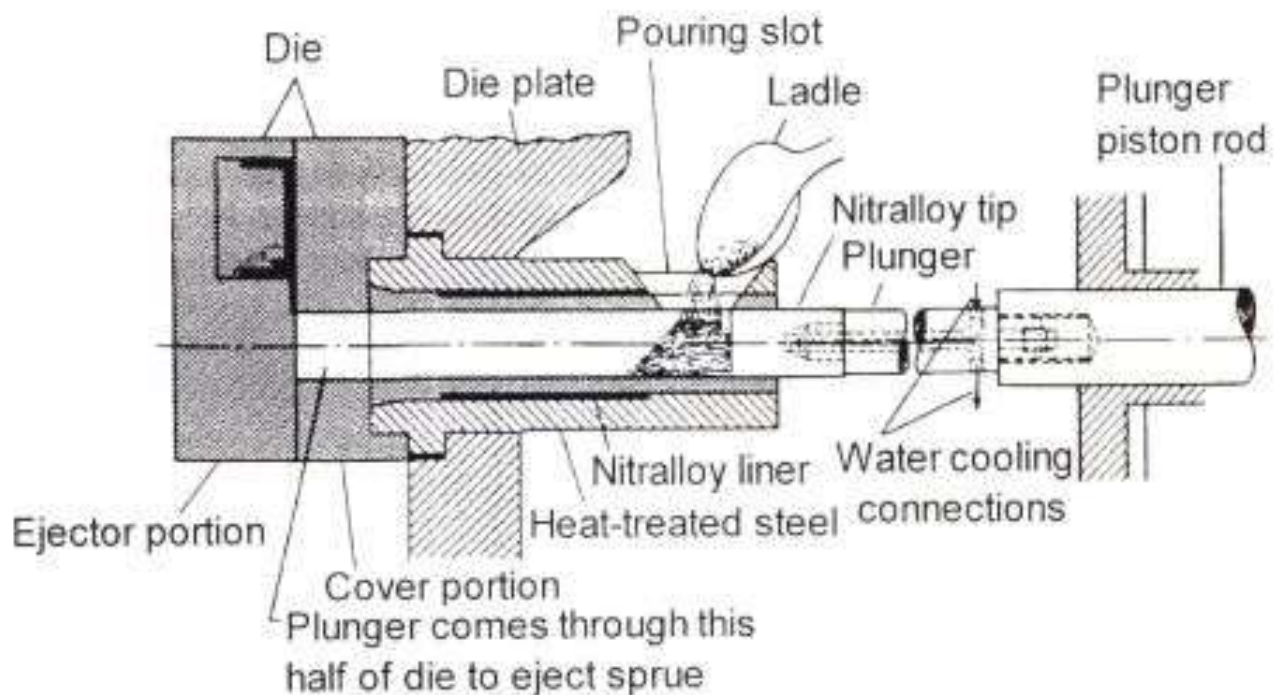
Schematic view of the cold-chamber die-casting process
